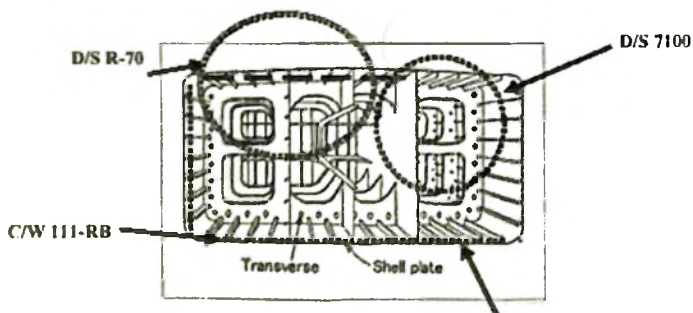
Welding of various parts of a ship with specially developed cored wires
